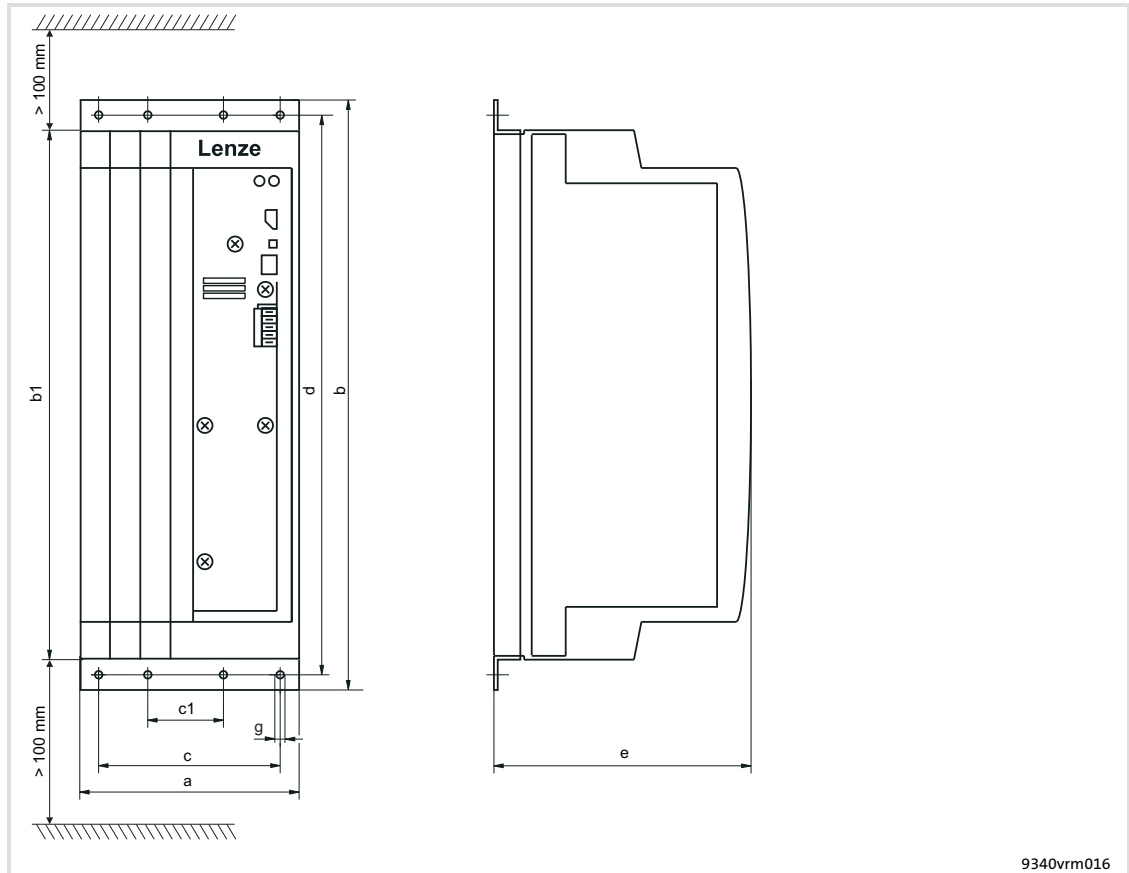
Dimensions of EMB9341-C and EMB9342-C
